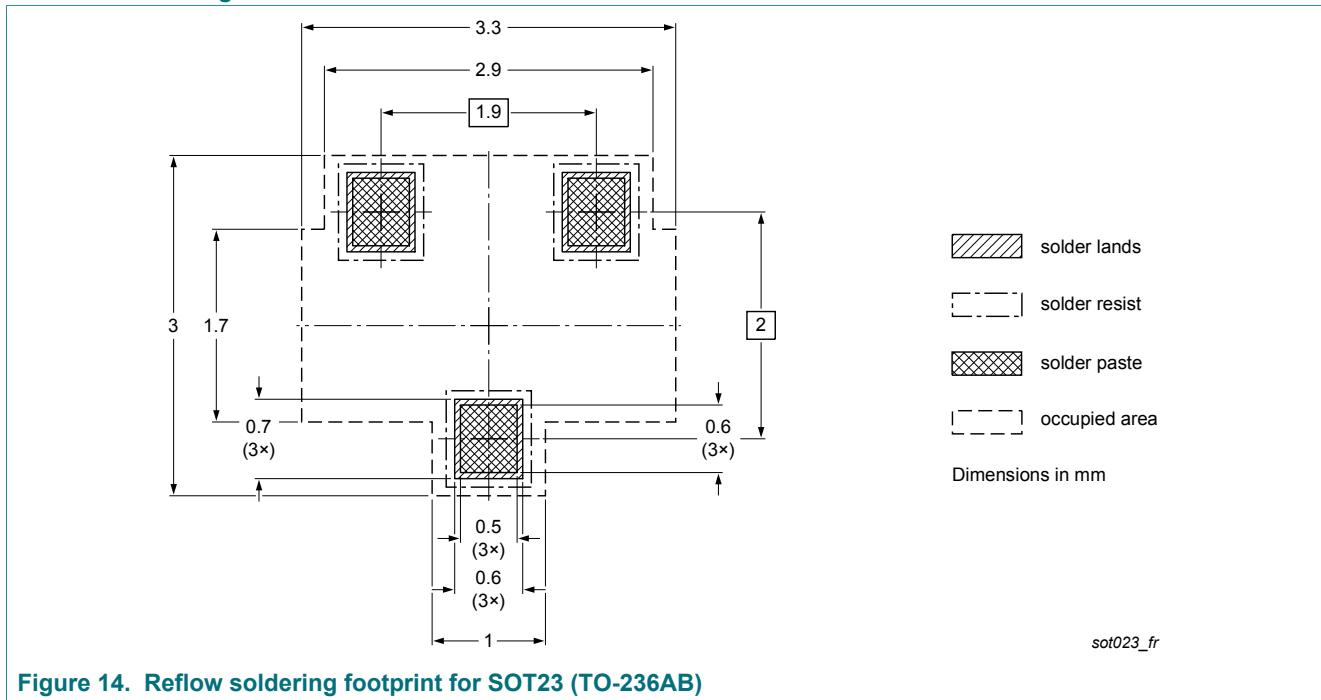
Reflow soldering footprint for SOT23 (TO-236AB)
